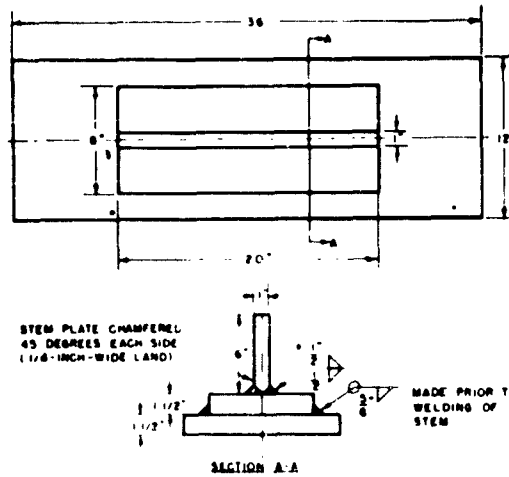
Details of Preparation of Multiple-Pass-Welded Tee-Shaped Specimen
